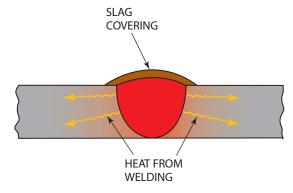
The slag covering keeps the welding heat from escaping quickly, thus slowing the cooling rate.
